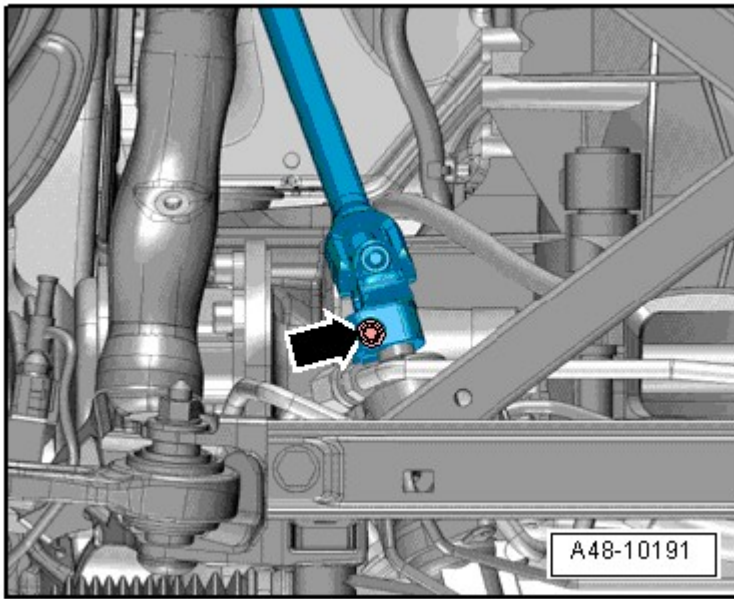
Pressing CV Joint Off Steering Gear And Slide It Up
